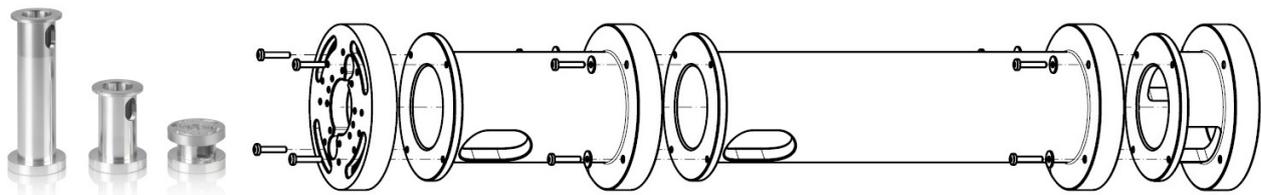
Example showing an assembly comprising all the metal DUT holder tubes
